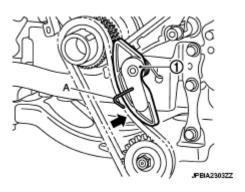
Identifying Stopper Pin And Oil Pump Drive Chain Courtesy of NISSAN MOTOR CO., U.S.A.
